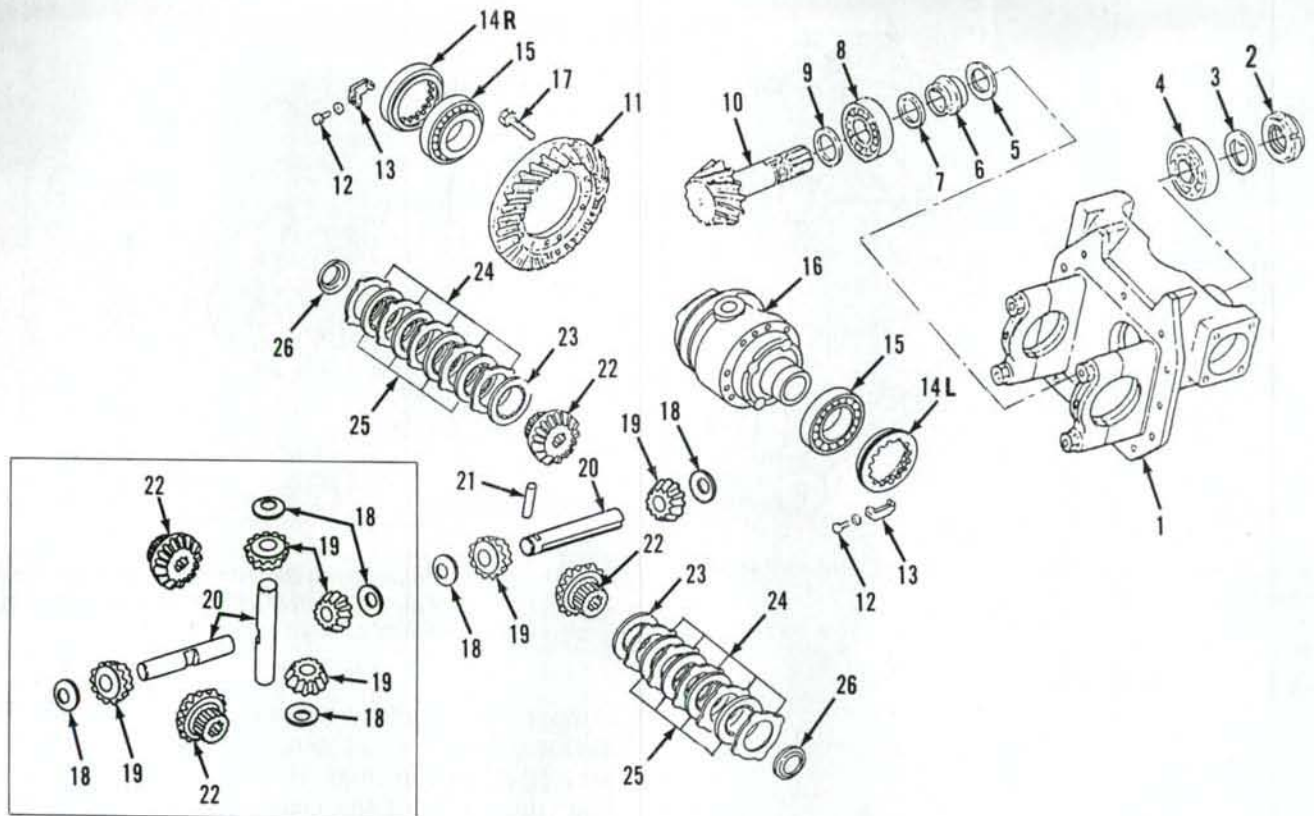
Exploded view of standard, two pinion differential assembly. Hydrostatic steering cylinder is attached to housing (1). Gears (10 & 11) are available only as matched set. The four pinion differential assembly shown in inset is used with heavy duty axle.
